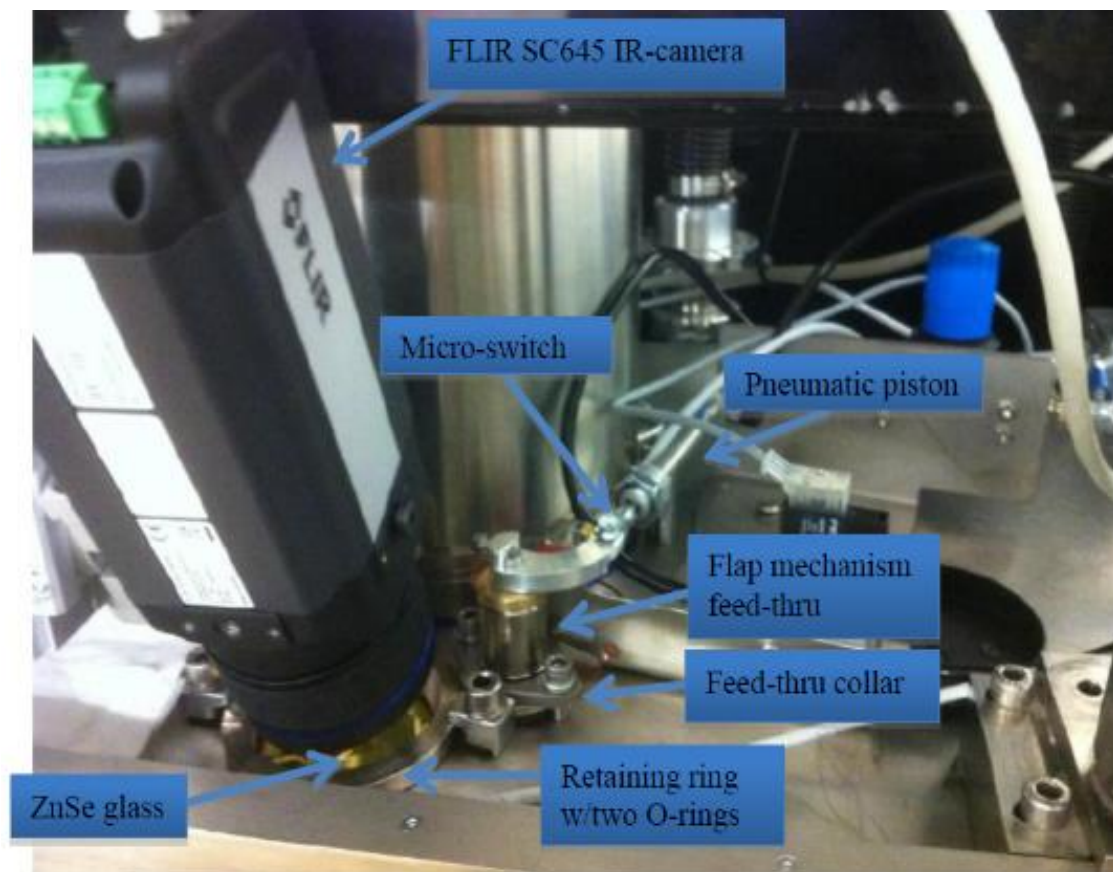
IR-Camera setup integrated to ARCAM A2 machine ^[72]
